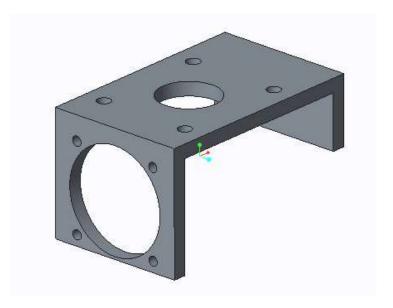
3D model of the fixing piece with the holes for the fan and the bolts.
